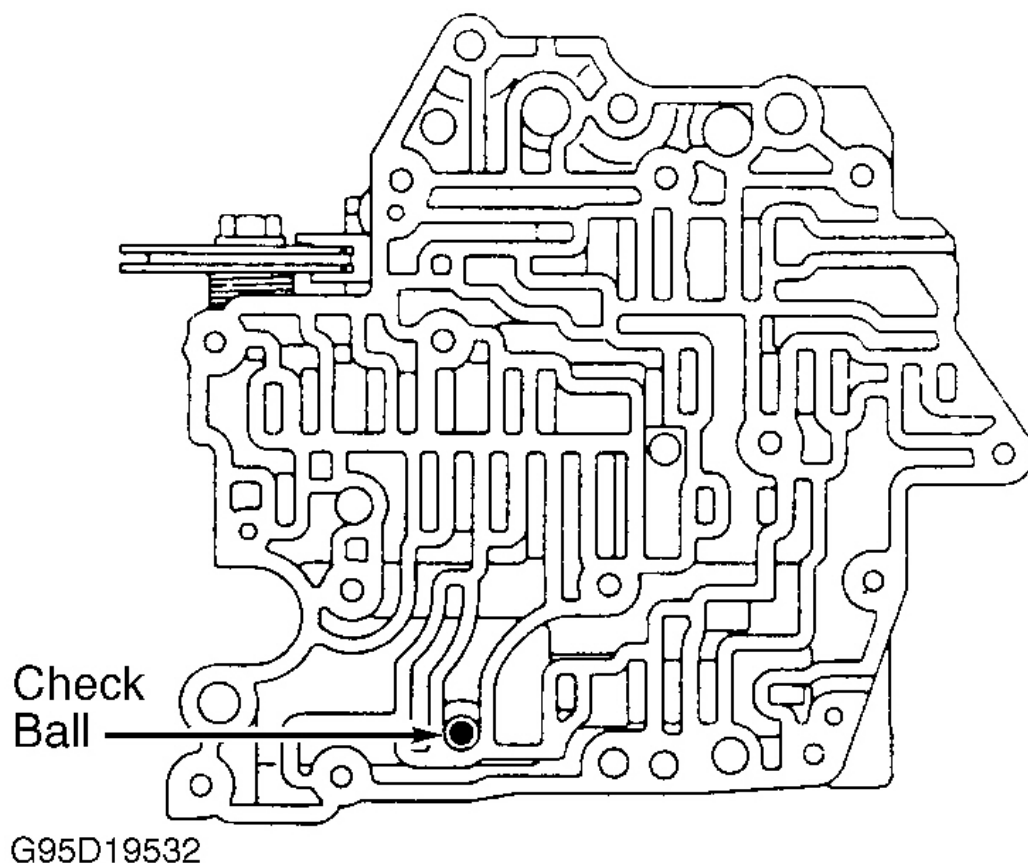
Locating A-541E Upper Valve Body Check Balls
